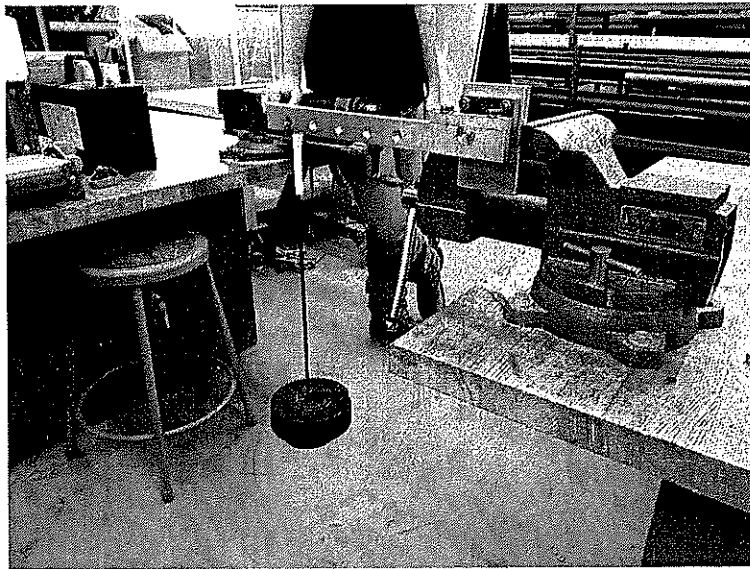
Assembly being tested by hanging a $10\frac{5}{5}$ kg disk by the end
